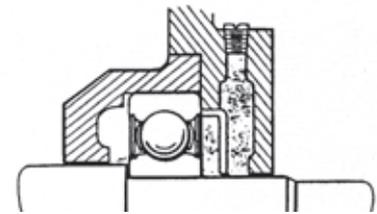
In this 1970s vintage bearing housing, the electric motor manufacturer placed a metering plate in front of a double-shielded bearing. The motor manufacturer thus reduced the risk of applying excessive pressure to the bearing shield adjacent to the grease reservoir.
